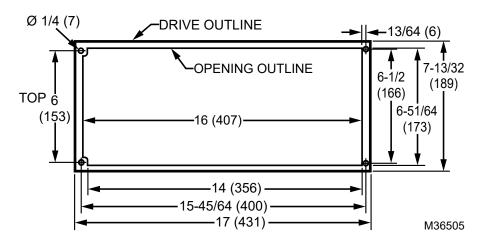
Flange mounting cutout dimensions for MI5 [Unit: inches (mm)]
